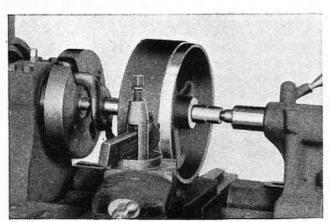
Turning a Crowned Pulley on an Arbor Between Lathe Centers
